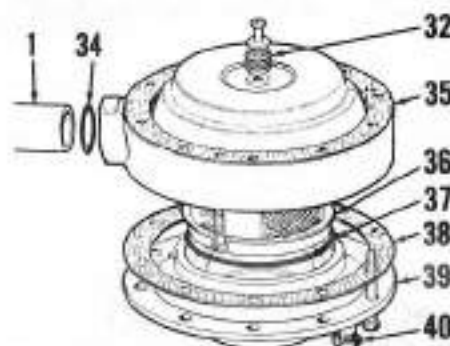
Exploded view of pump suction screen, housing and cover for model 1200 with dual pump and early model 1200 with single pump. On late model 1200 with single pump, a full flow element similar to that shown in Fig. 176 is incorporated into the assembly.
